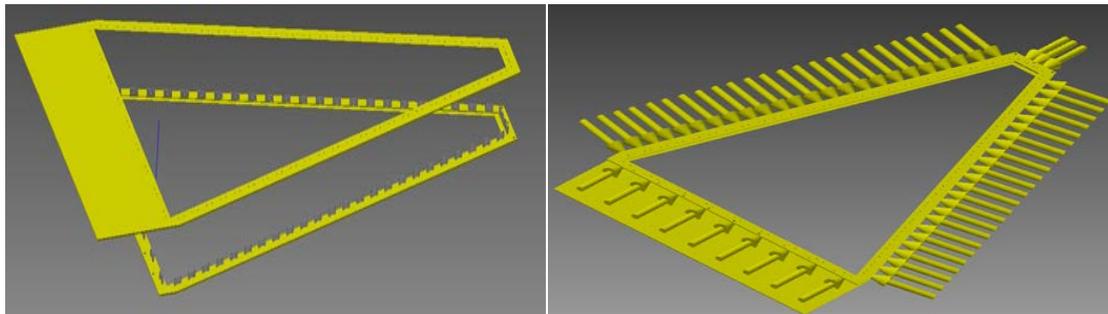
Left: Exploded view of chamber frame assembly with readout support frame shown above drift support frame. The two frames are held together by 60 pull-out posts (gray) that are also used for attaching and stretching the foil stack. Right: Inventor simulation of tension forces from stretched foil stack applied to posts in assembled frame; forces point towards the foil stack and are perpendicular to the post faces.
